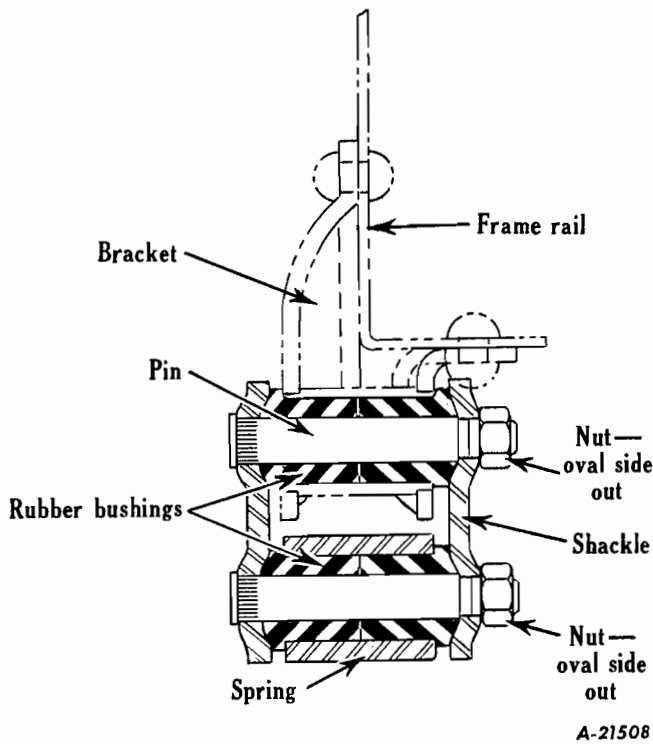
Front Spring Rear Shackle For Models L-110, L-120, LM-120.
